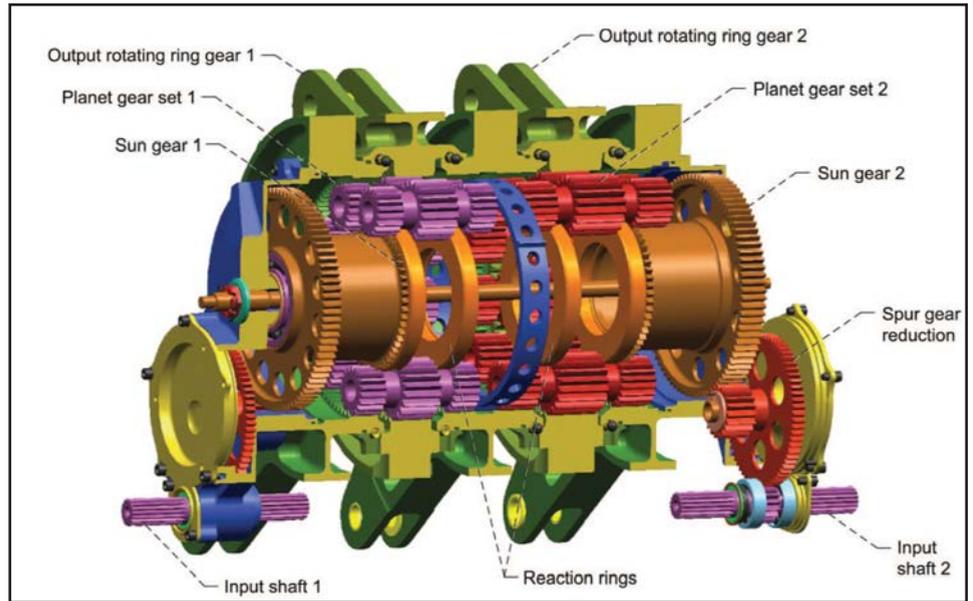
Schematic of space shuttle rudder/speed brake (RSB) actuator.
